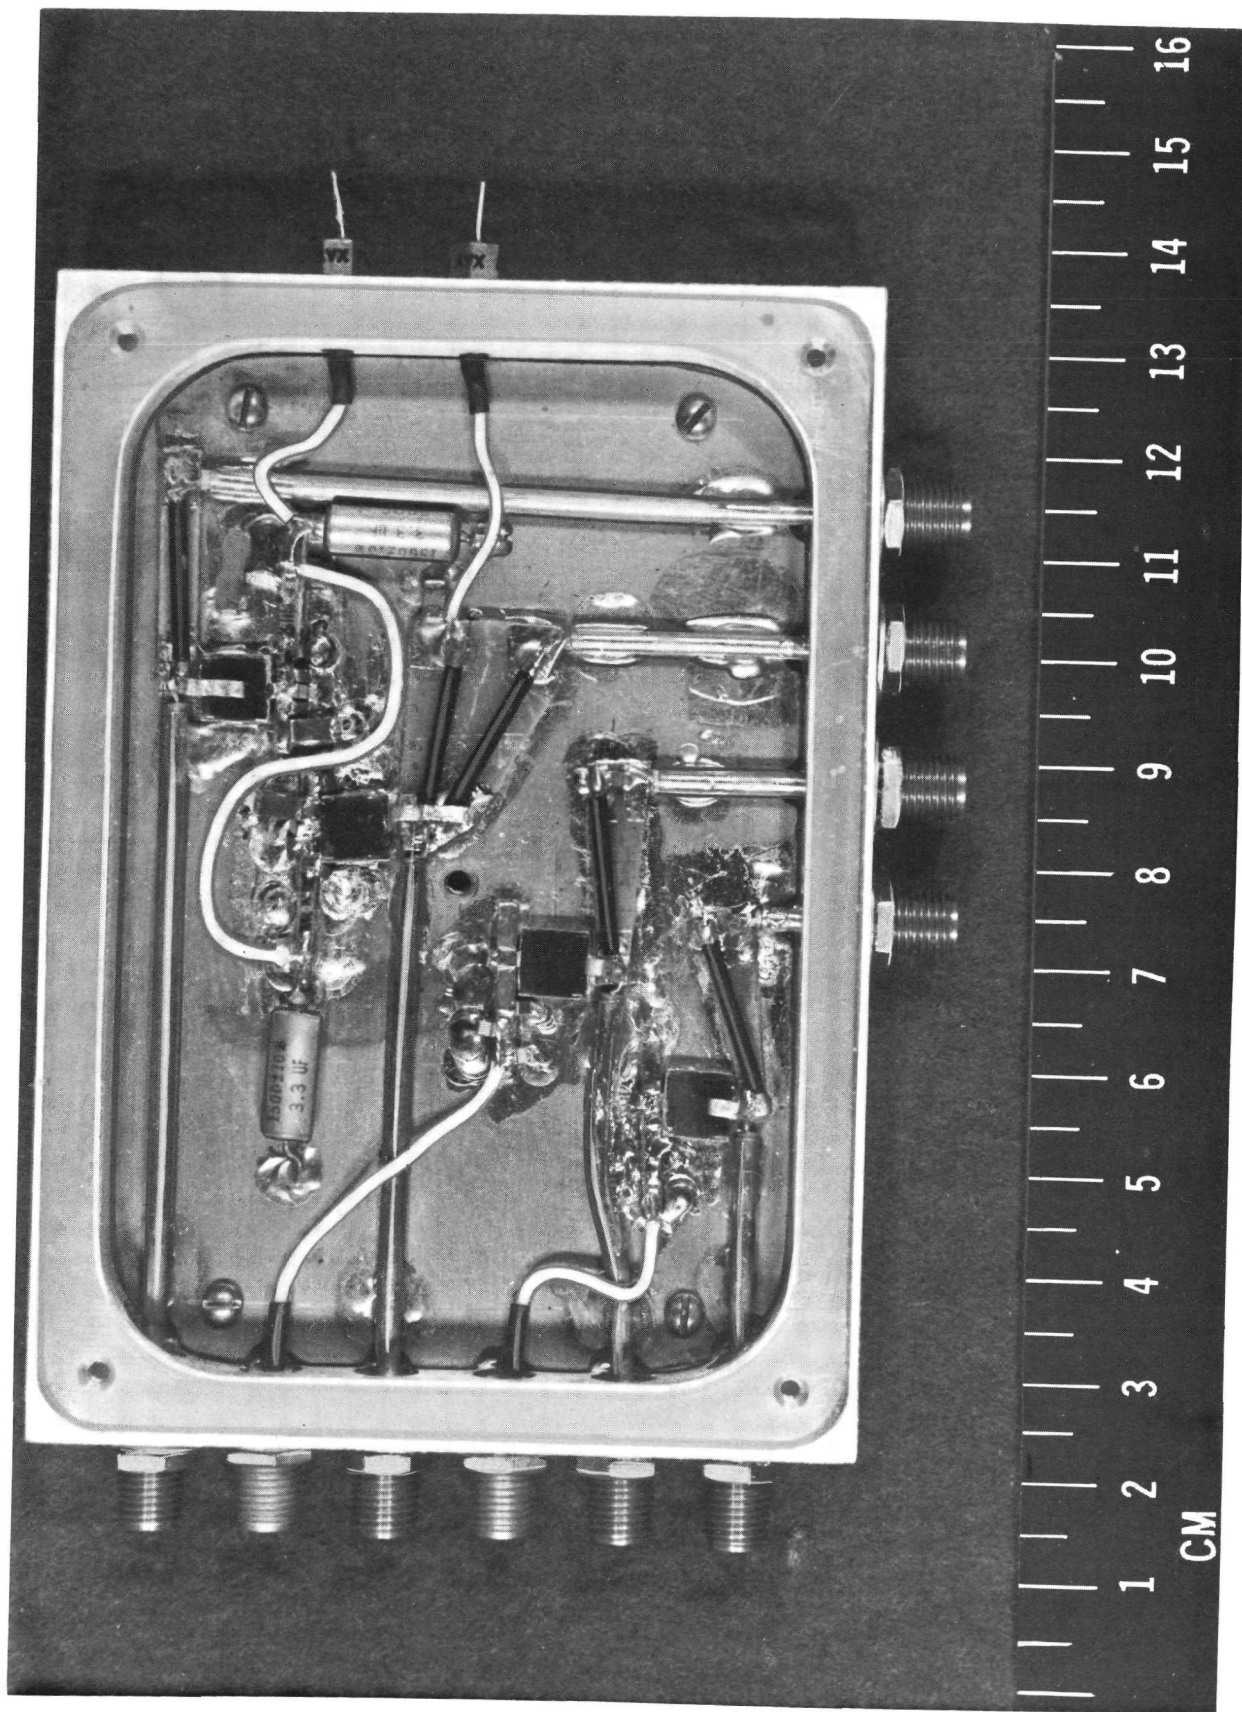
MODULE D OF THE ELECTRONICS ASSEMBLY -
